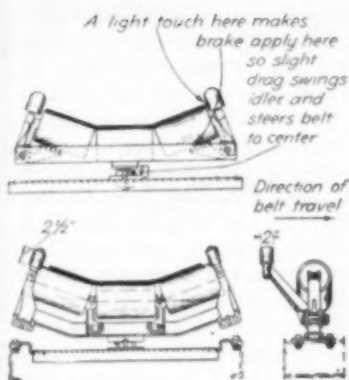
Two successful designs of self-aligning idler for belt conveyors
